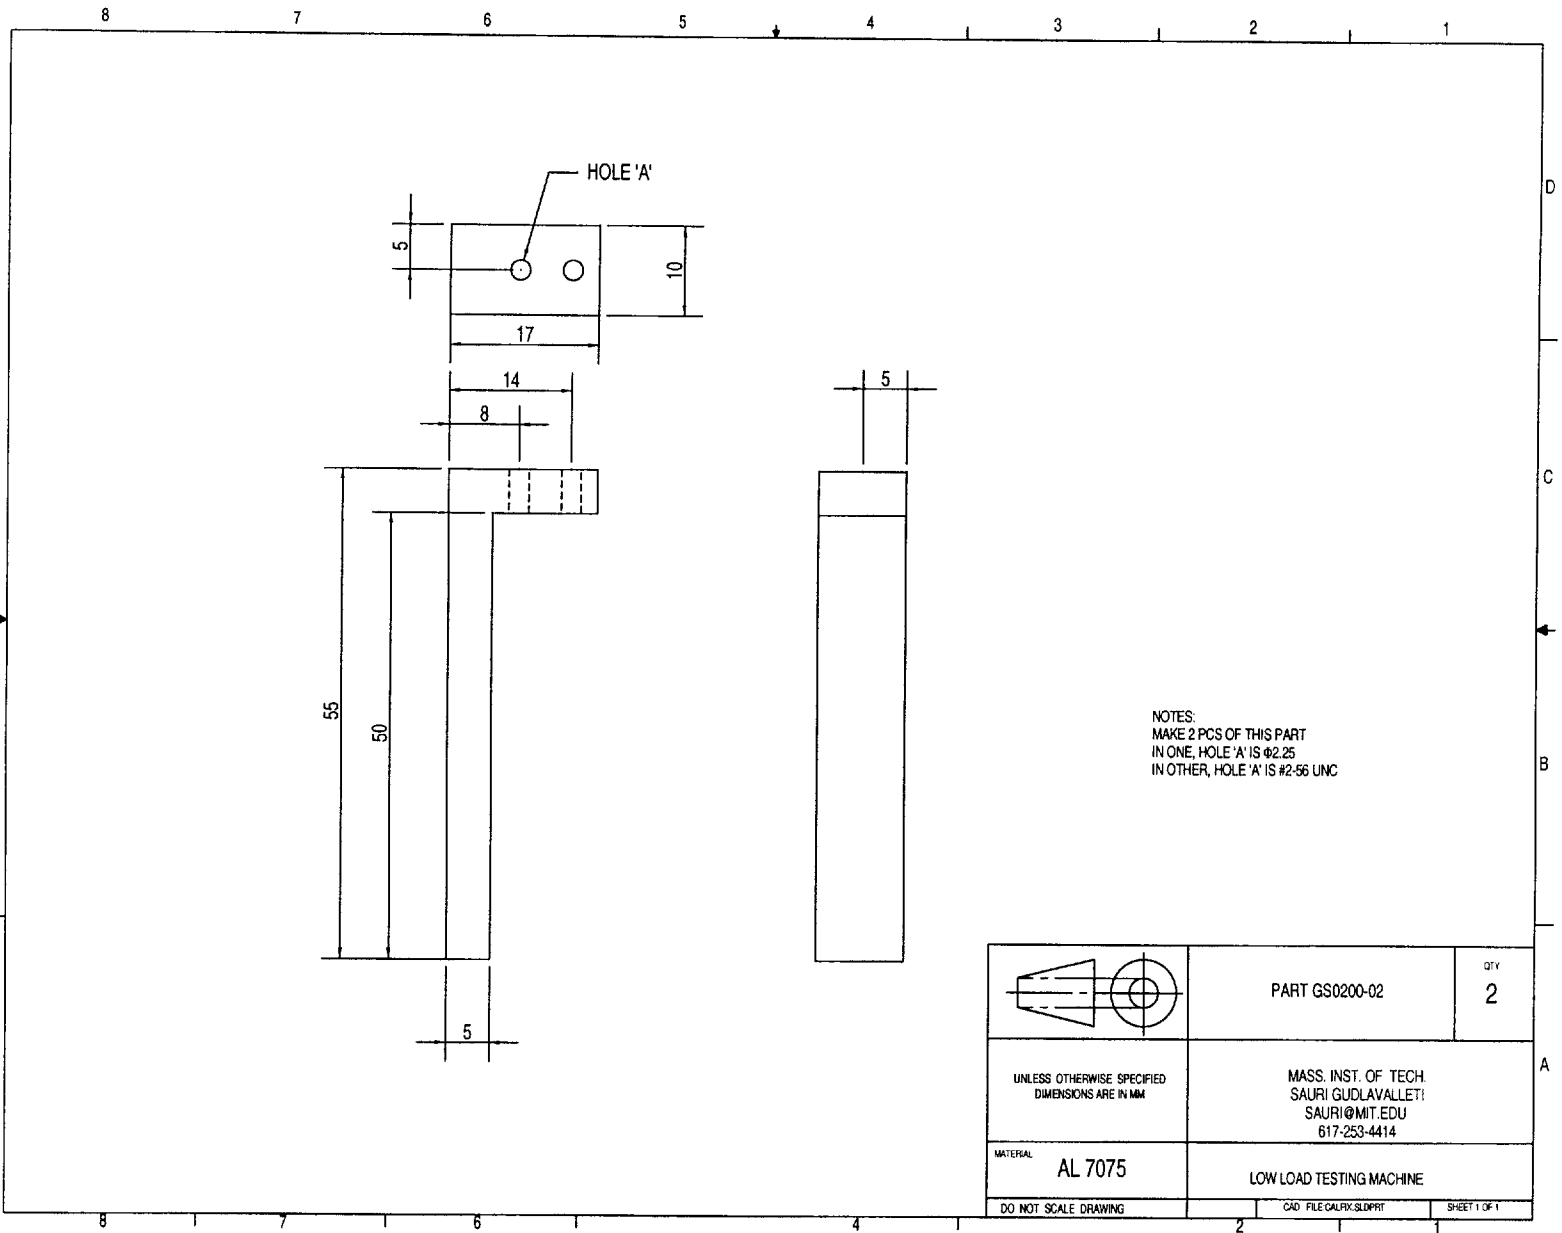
Part GS 0200-02. Calibration fixtures. Assembly shown in Fig. 3-8.
